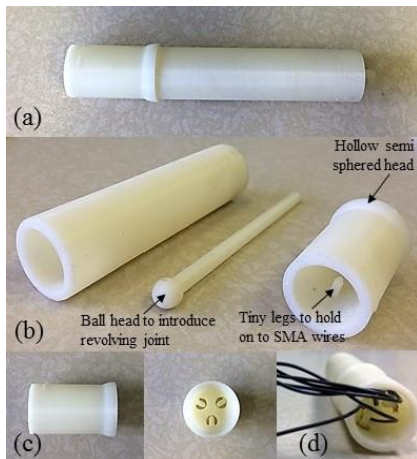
3D printed parts of the MitraClip locator device: (a) the assembled model, (b) individual parts, (c) side views of the top end, and (d) the model with the actuators attached.
